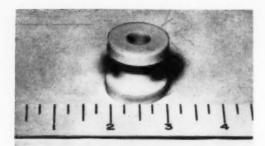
Tensile Specimen for Testing Ceramic-Metal Bonds
